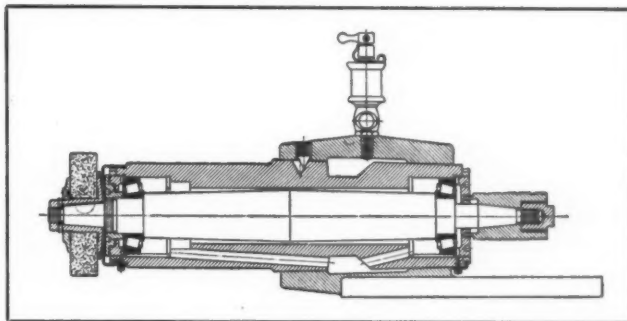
Mounting for a Vertical Grinding Machine Spindle
